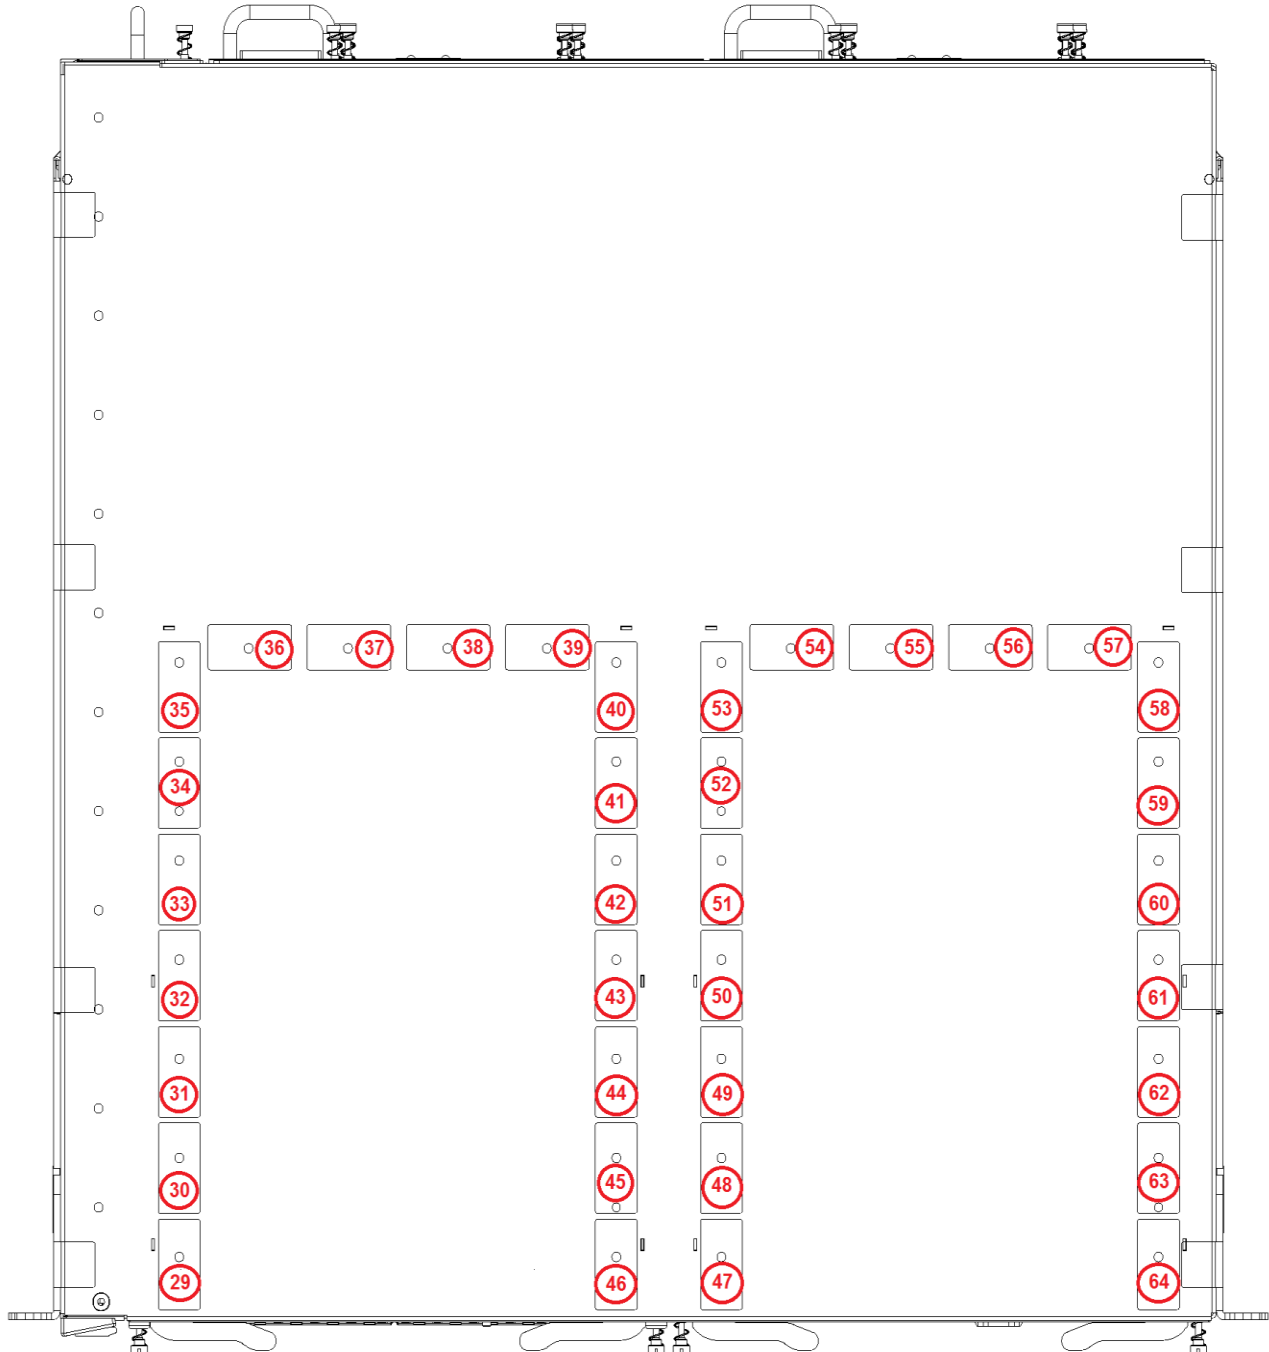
Tamper Evident Seal Placement on Top of HP 5406 zl Switch Chassis (18 Seals per Three-Quarter Rectangle)
